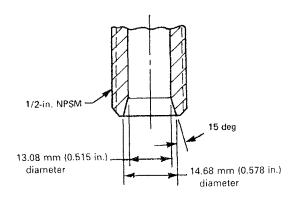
STANDARD SHANK INLET DIMENSIONS
